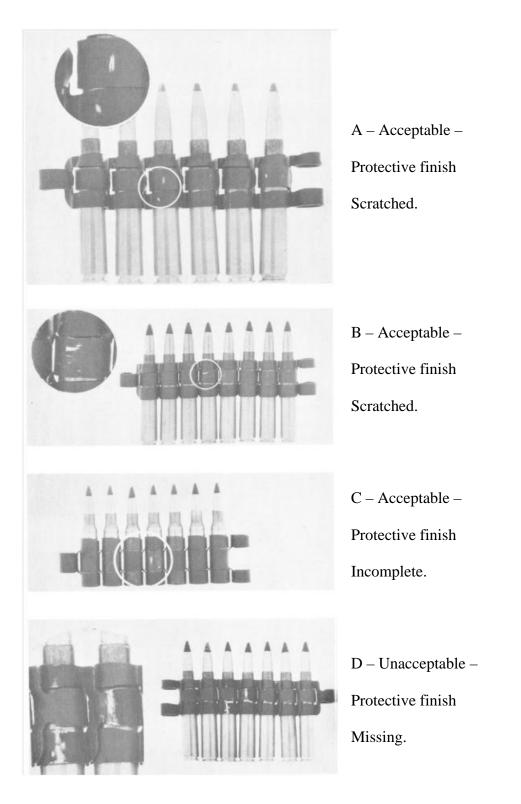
<u>Metallic linked belt package defect #7 – defective protective finish or rust on link</u>.
